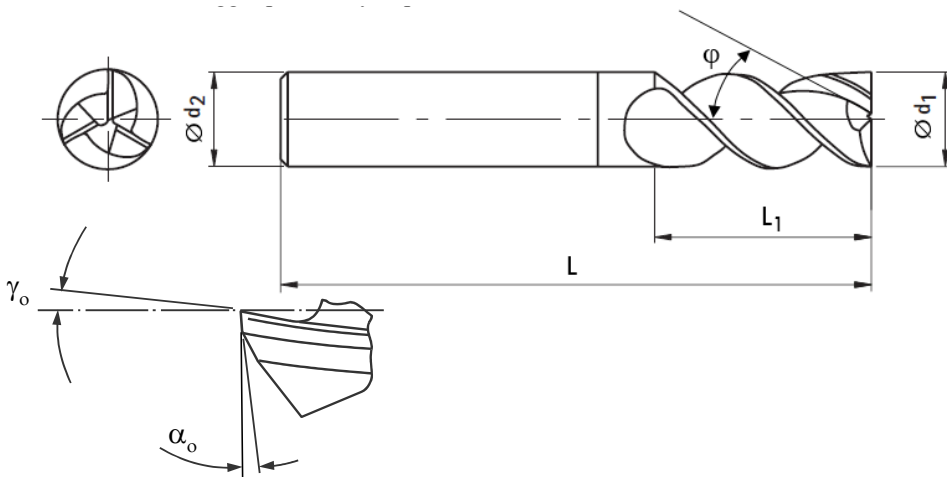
Basic geometry of an end mill (α_o – tool orthogonal clearance angle, γ_o – tool orthogonal rake angle, j – helix angle)
